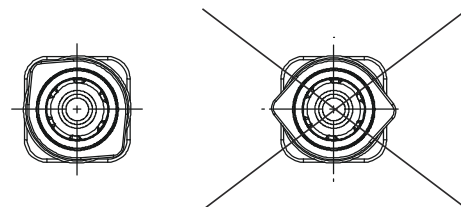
Fitting the O-ring on the stationary shaft seal part
